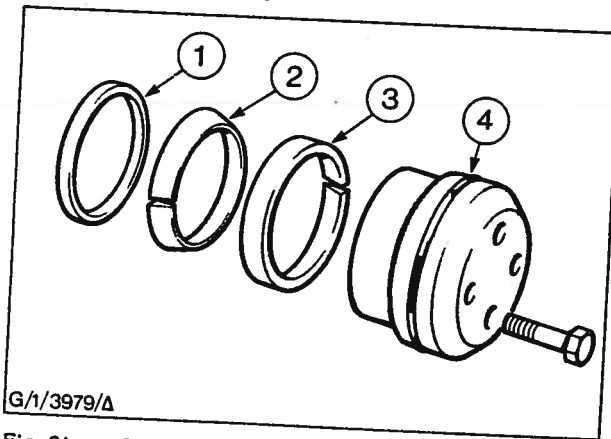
Crankshaft Pulley Retaining Components - 2728T Engine (Ringfeder Locking Mechanism)
